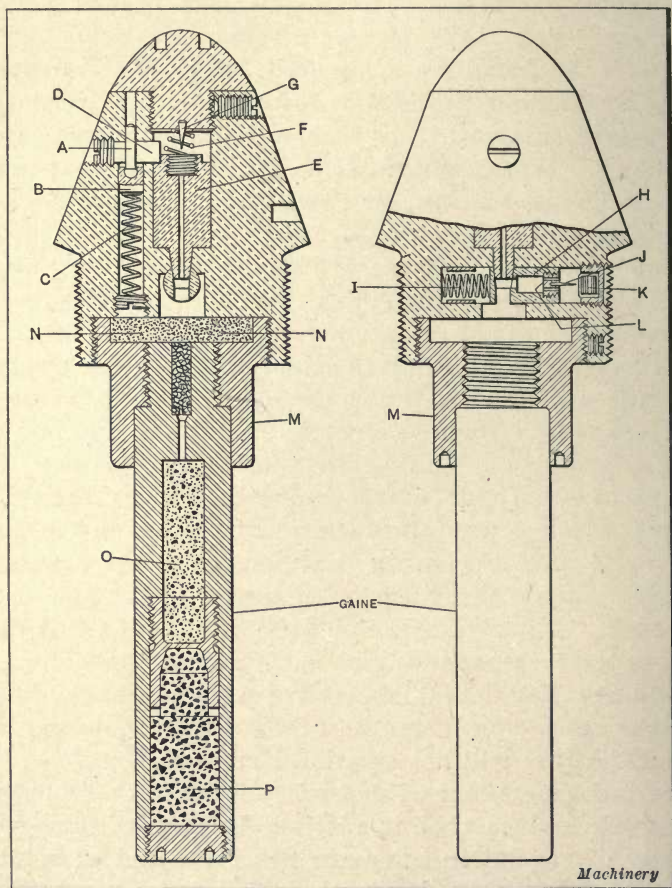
British No. 100 Graze High-explosive Shell Fuse
